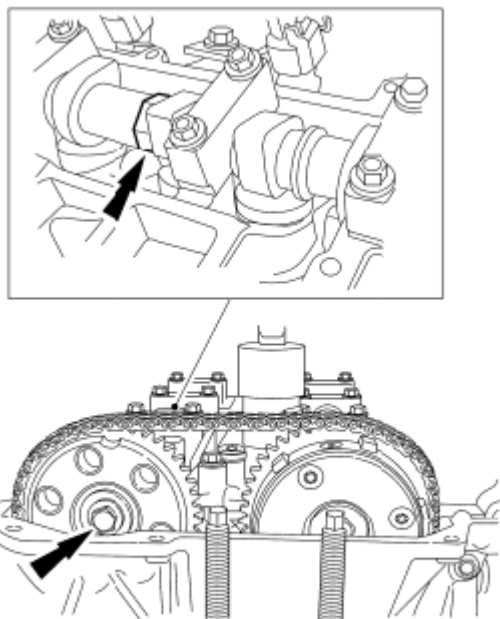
Locating Exhaust Camshaft Drive Gear & Bolt
